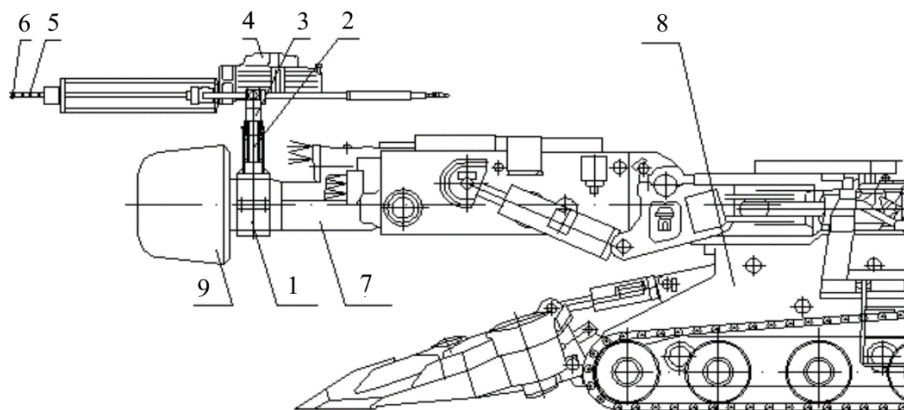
The device for mechanized drilling of boreholes or wells in the emission hazardous coal seam, which is placed on a telescopic boom of the operating device of a roadheader [3].
